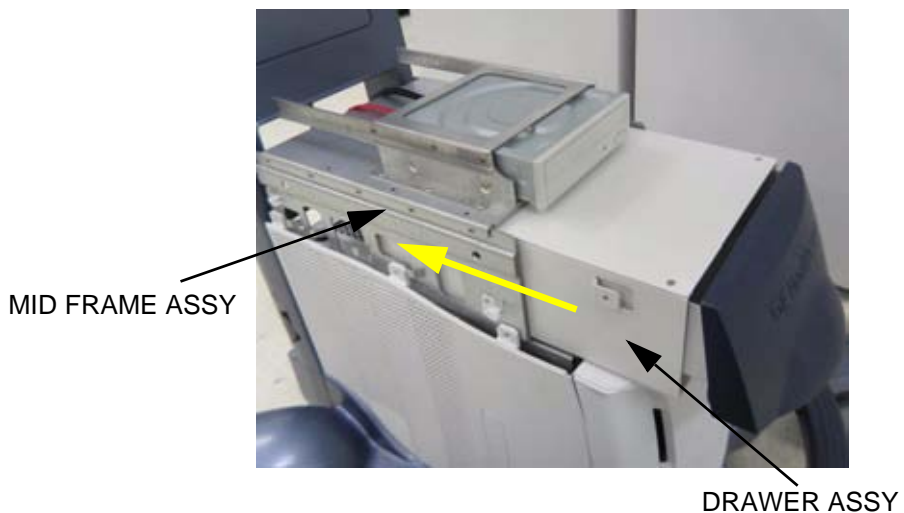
Place DRAWER ASSY on the MID FRAME ASSY
